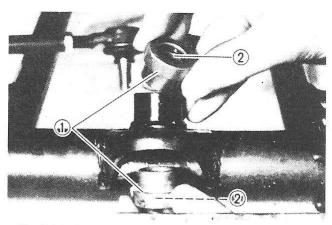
Check the steering shaft bushings in the lower frame mount (1) and the O-rings (2) for wear and damage (Sec 10)
